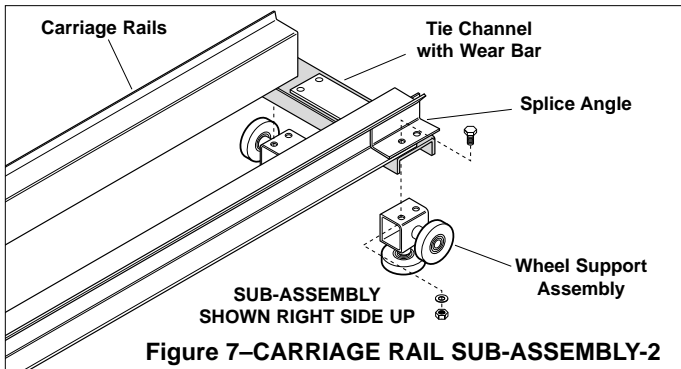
CARRIAGE RAIL SUB-ASSEMBLY-2
